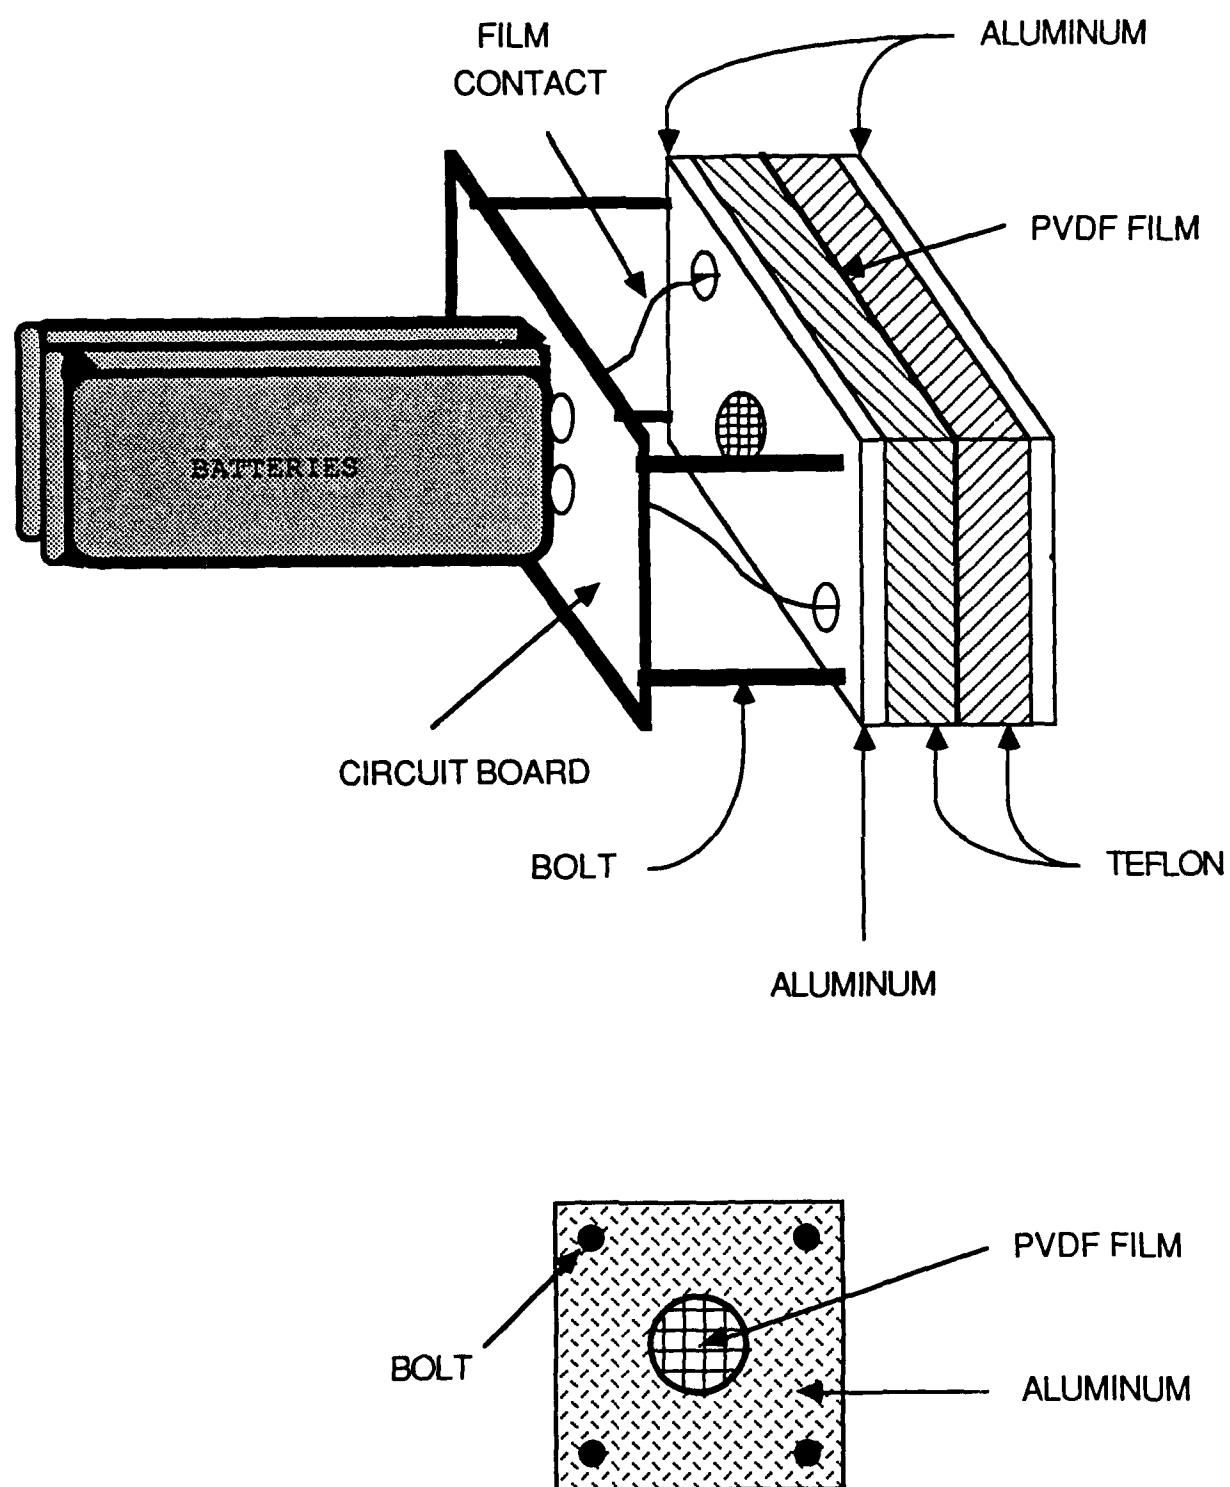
SENSOR ASSEMBLY -- PROFILE AND FRONT VIEWS
